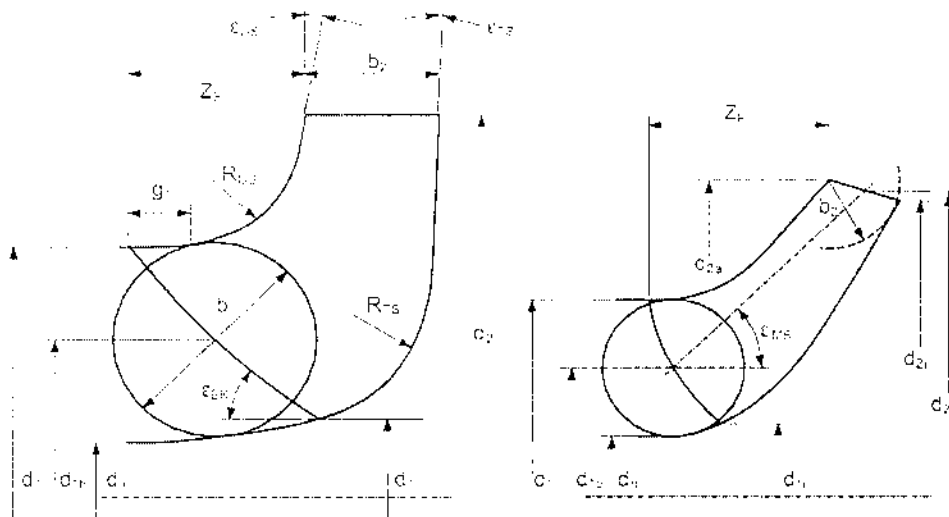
Design parameters for the meridional section of the impeller. Left: radial impeller, right: semi-axial impeller
